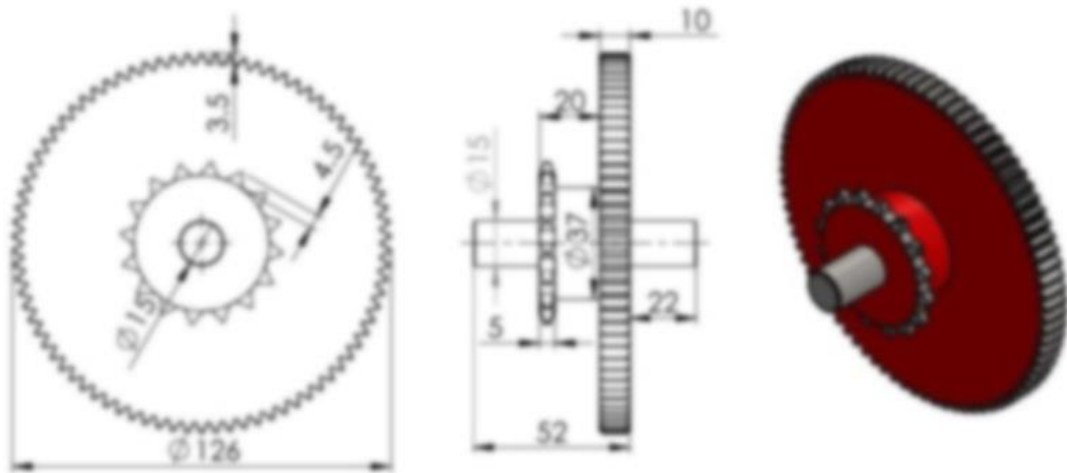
Mechanical Design and Dimensions of The Reduction Gears
